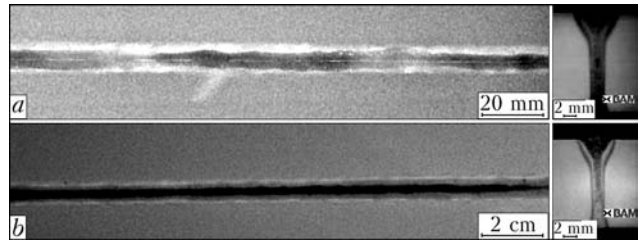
X-ray photos and macrosections of the hybrid welds on steels X65 (a) and X56 (b)
